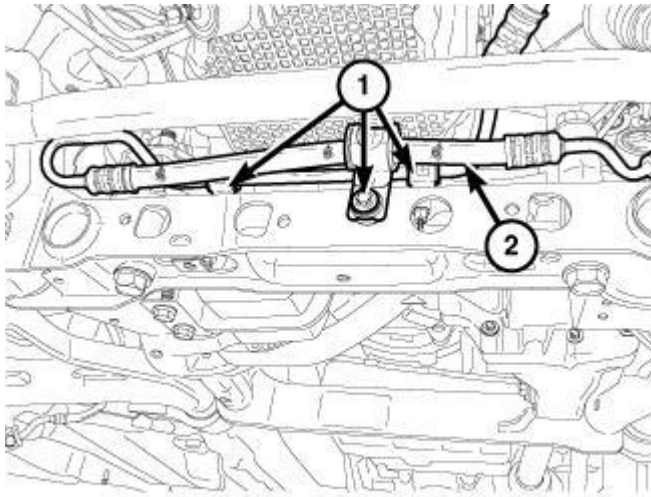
Steering Gear Pressure Line Retainers & Pressure Line
